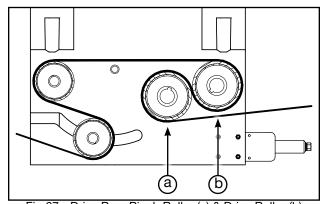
Drive Box, Pinch Roller (a) & Drive Roller (b)
